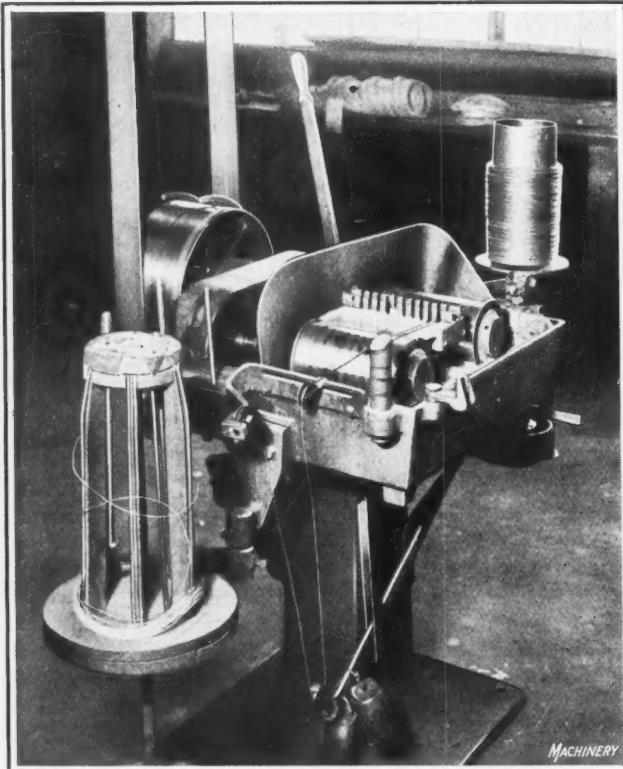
Another Wire-drawing Machine, showing Automatic Arrangement for stopping
